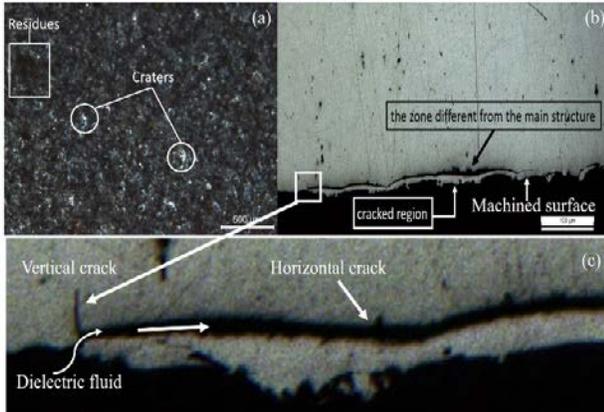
Machined surface texture of the specimen (a) and cutting line (b), higher magnification of the vertical and horizontal cracks (c)
